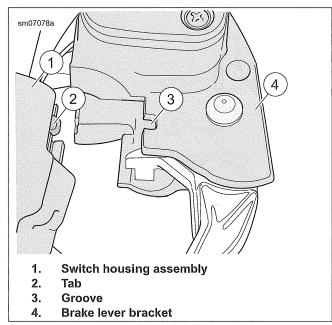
Attach Master Cylinder to Right Handlebar Switches
